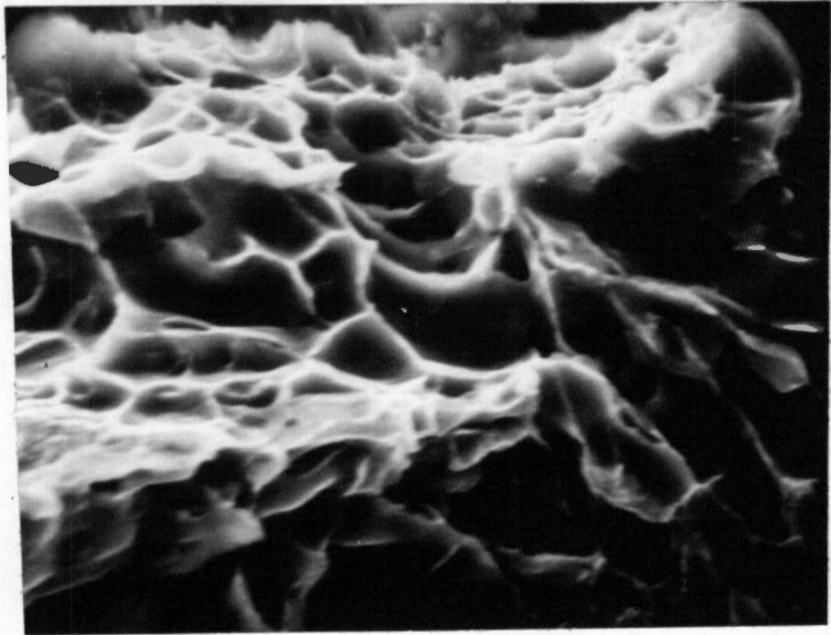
SEM Fractograph at the Center of Figure 44 Showing Details of the Observed Ductile Fracture.
